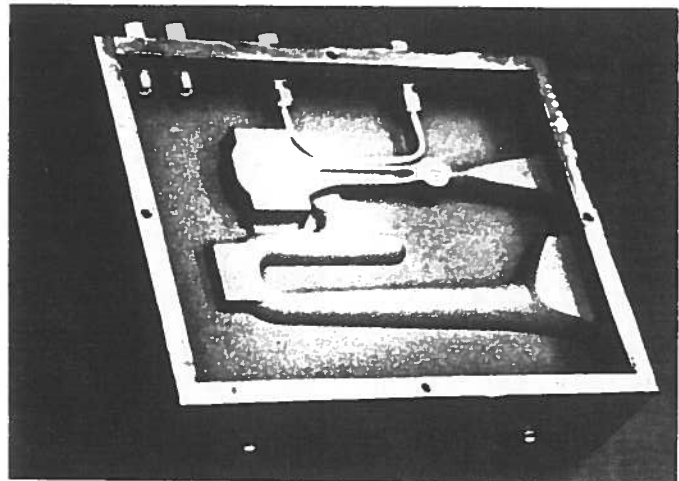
Connecting Rod Casting Tool — Back of Sprayed Shell
